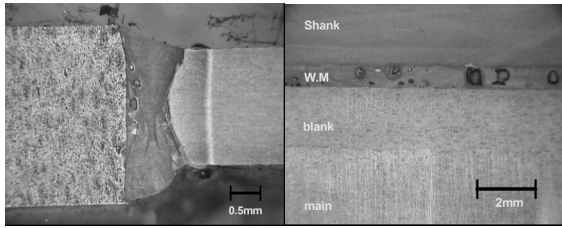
Inner cavity distribution in cross and upper section of laser welds
